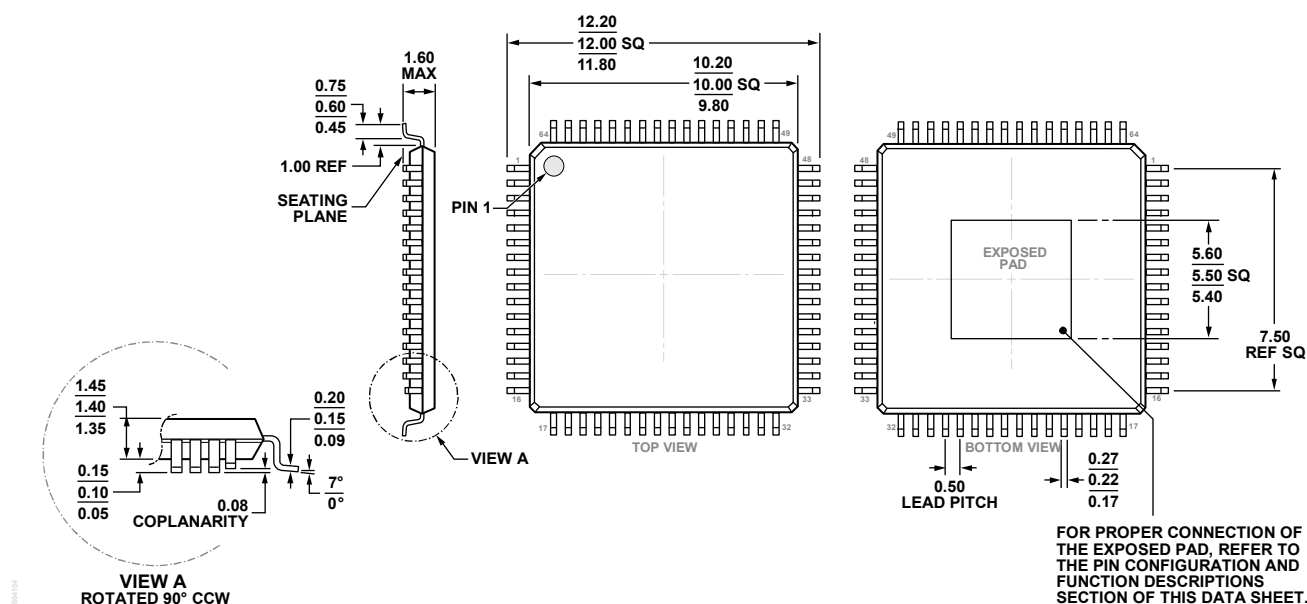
64-Lead Low Profile Quad Flat Package, Exposed Pad [LQFP_EP]
